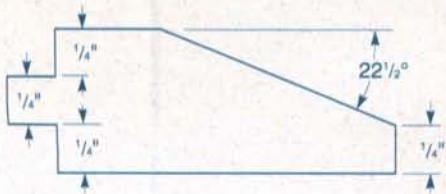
To make the edging, form tongues with a 1/4" dado blade and rip a bevel on the top surfaces. Miter the pieces to length when you're done.
